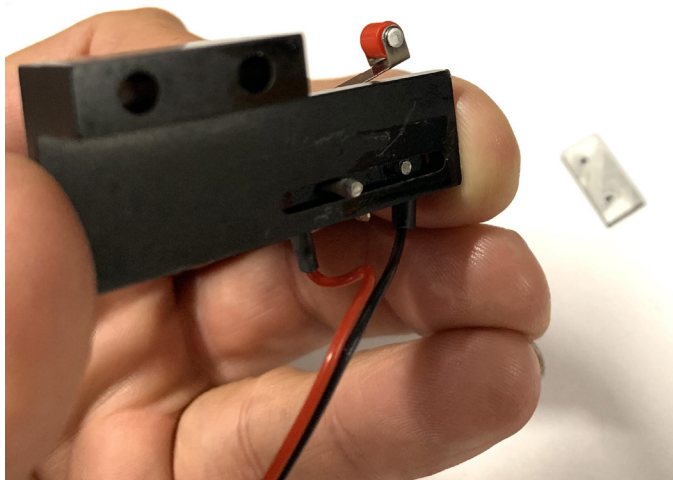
Backside view of the Y-axis limit switch assembly.
